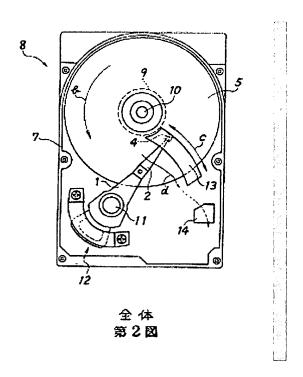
and Fig. 2 shows one embodiment example of the present invention. Fig. 1 shows an expanded side view for the key components. Fig. 2 shows a planar view of the housing when the cover is removed.
